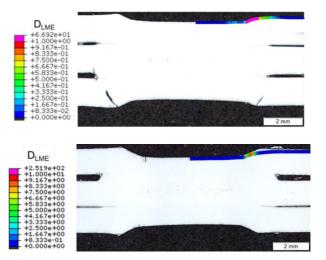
Cross-section of a weld spot made with standard electrode caps (top) and with K-electrode caps (bottom); in the top case, cracks are clearly visible in the weld metal, image: MCL
